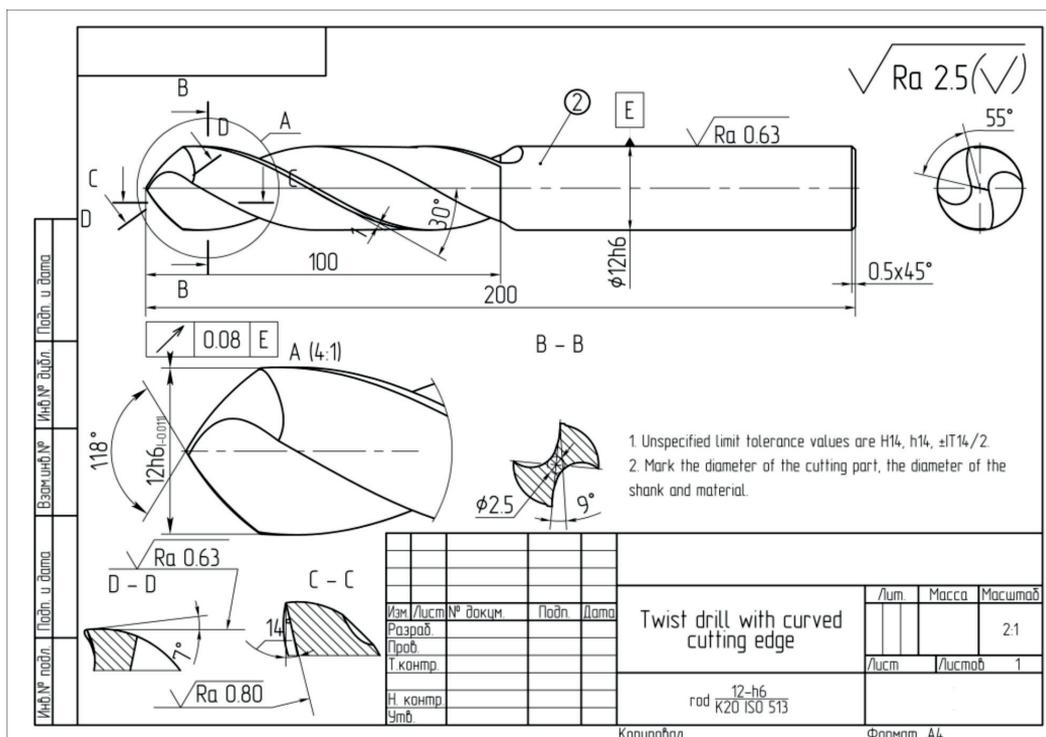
Technical drawing of a twist drill with toroidal flank surface
